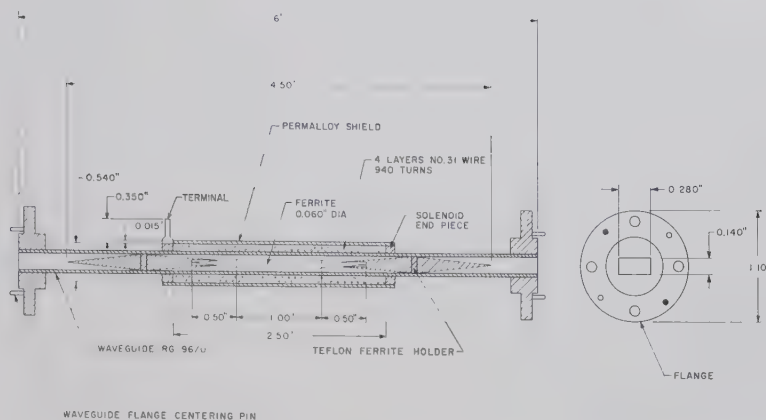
Assembly drawing of the  $K_a$ -band phase shifter.
